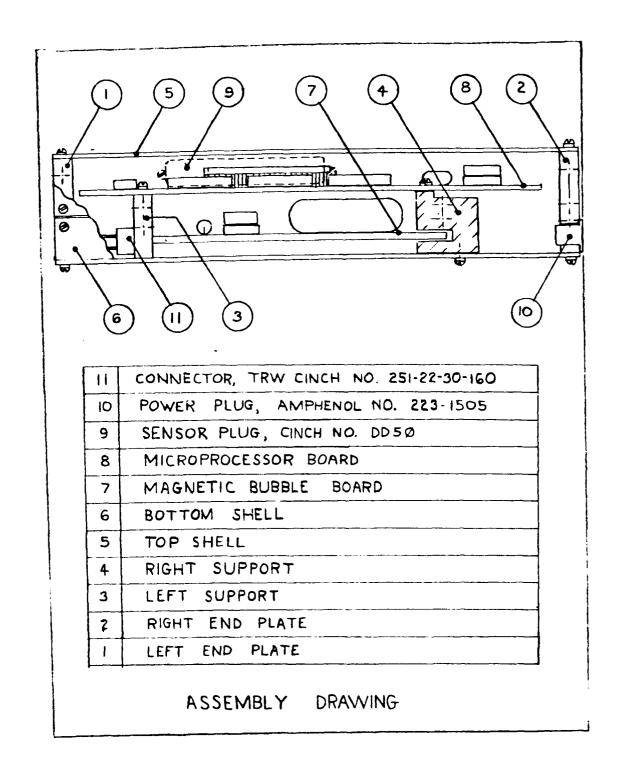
Flight Recorder Mechanical Drawings, Sheet 1 of 6
